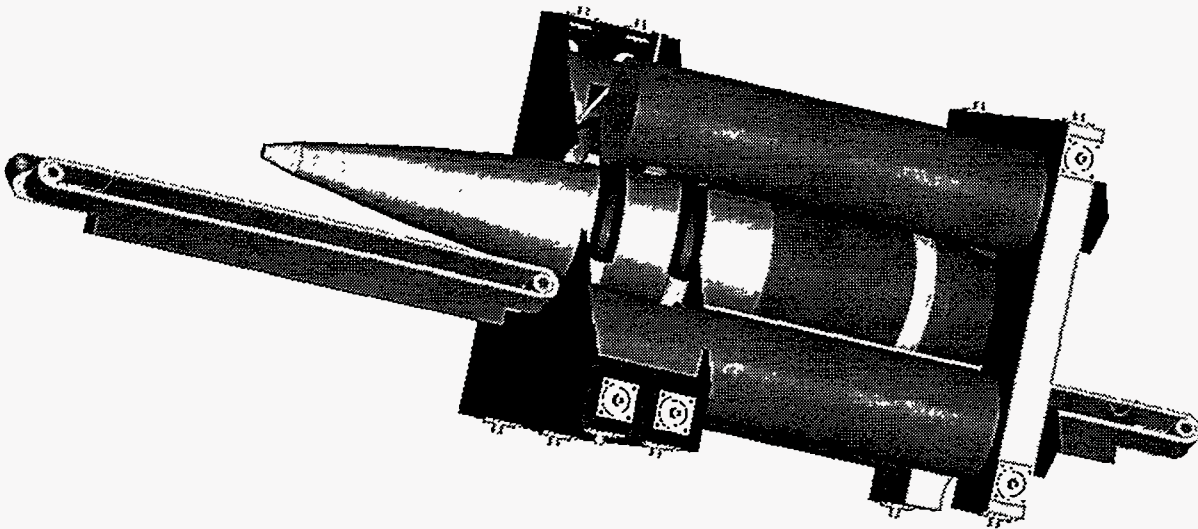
Mechanical design of a production identification module showing four imaging tubes and the conveyor belts used to move the ammunition.
